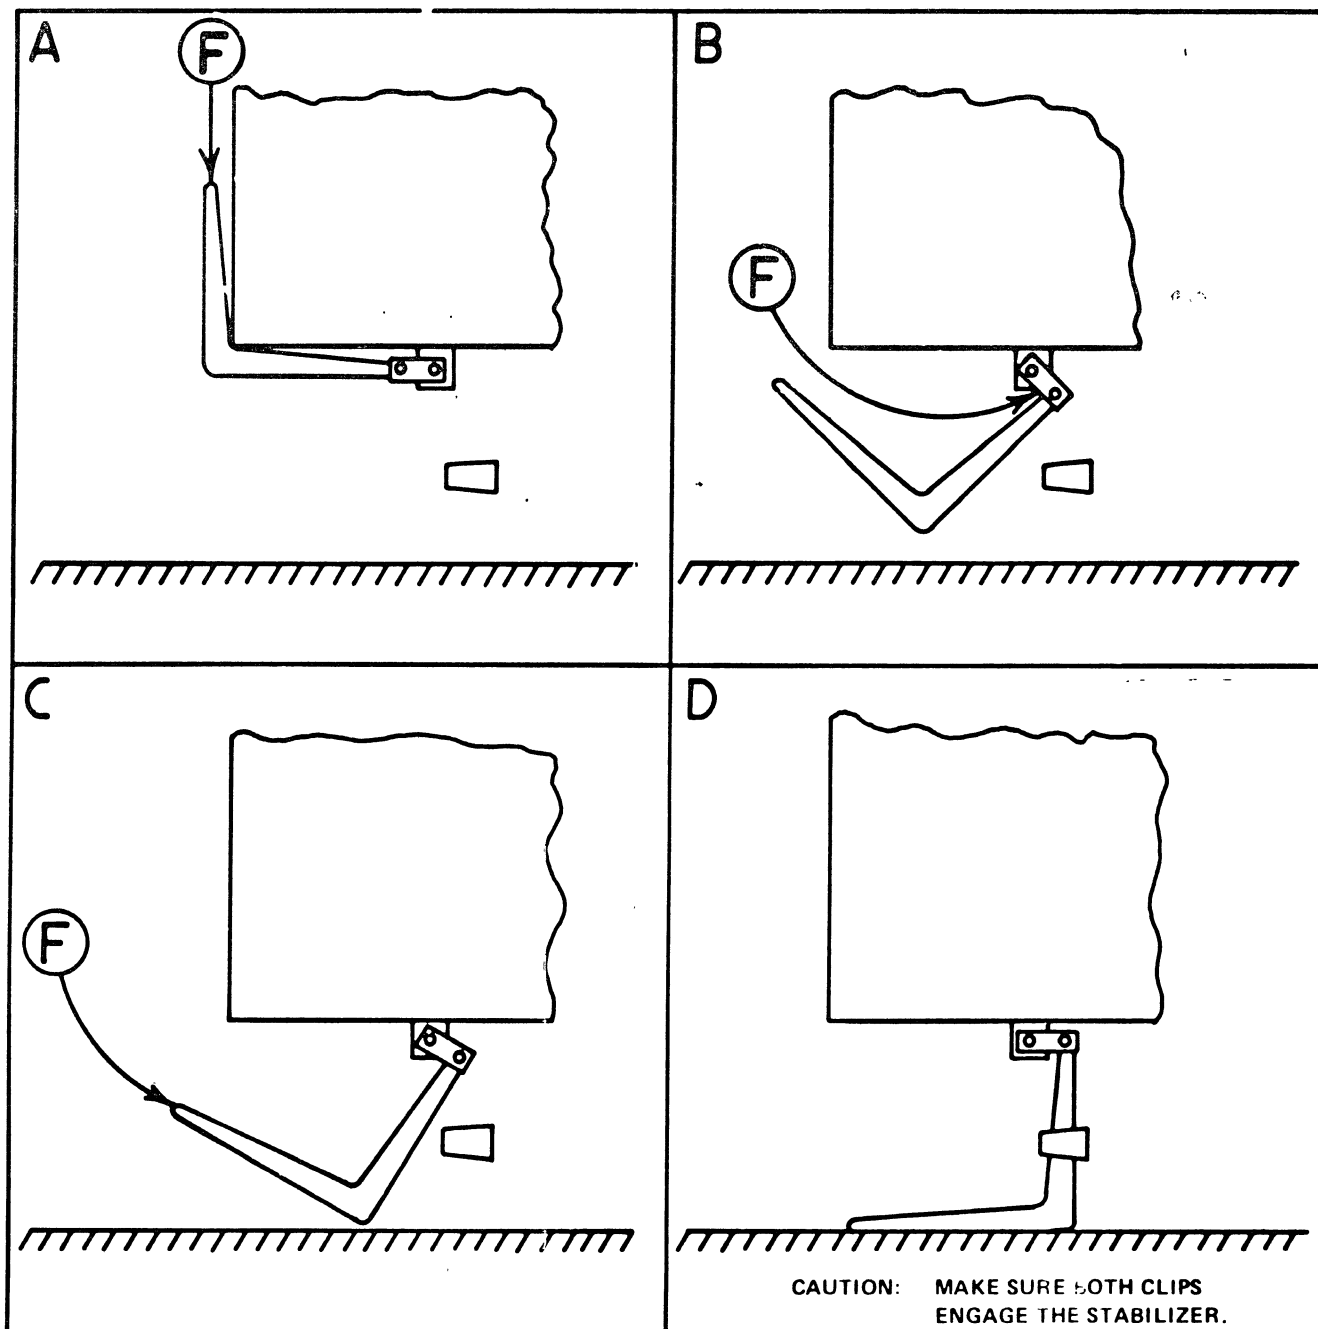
ILLUSTRATES HOW TO ENGAGE THE STABILIZER ON THE IBM 4997 RACK FOR MACHINES WITH EC 374920. NOTE THAT THIS STABILIZER MUST BE FASTENED TO THE FRAME AS SHOWN IN STEP C USING THE 4 SCREWS, P/N 52580, RECEIVED IN 4997 SHIP GROUP.
